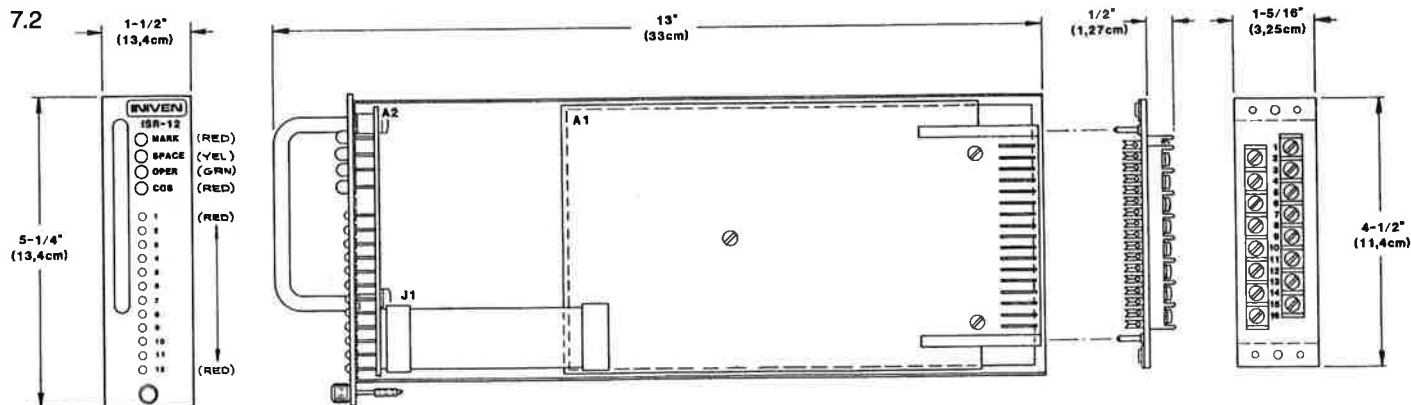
ISR-12 Scanner Receiver — Dimensions and Component Identification
